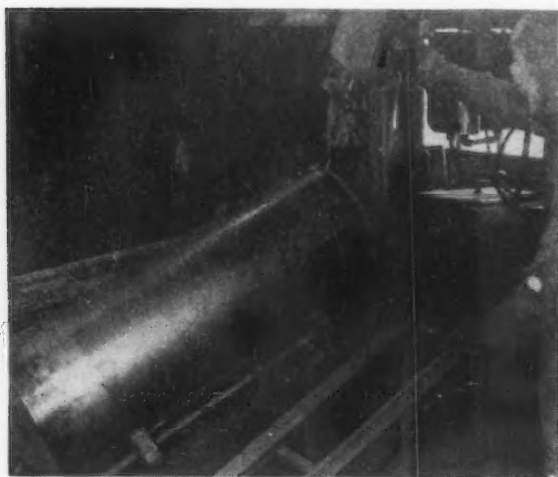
Rotating fixture employed at Michiana Products Corp. for welding heads in low-carbon steel water tanks. The tanks are turned at a welding speed of 40 ipm by a motor and Reeves pulley drive.
